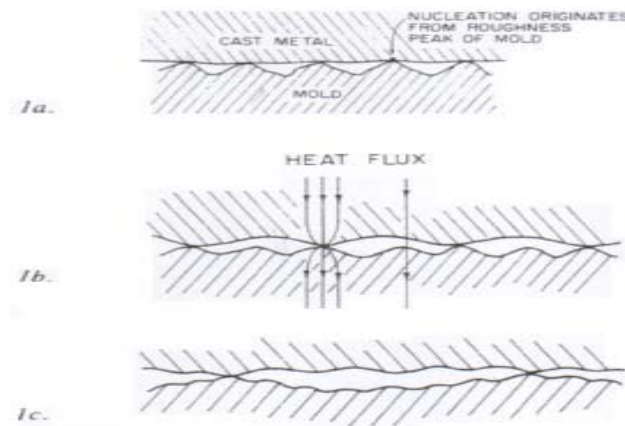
Mechanism of heat transfer at a metal-mould interface [88]
